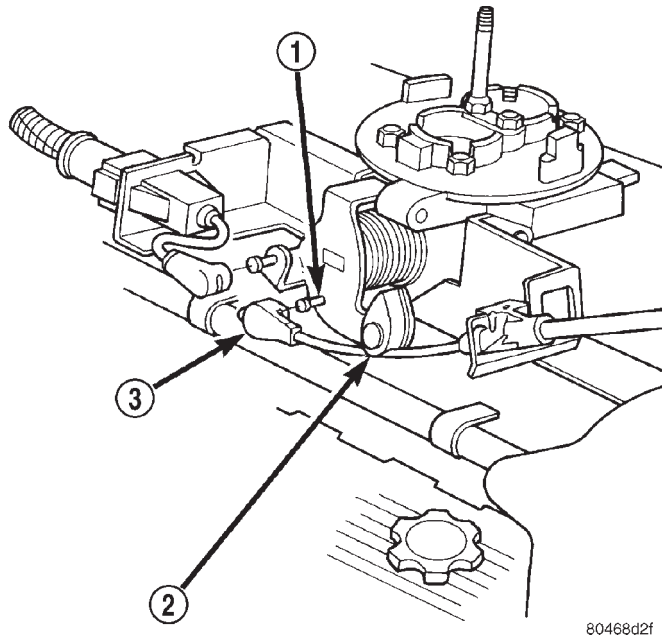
Throttle Cable at Throttle Body—Typical (V-8 Shown)
